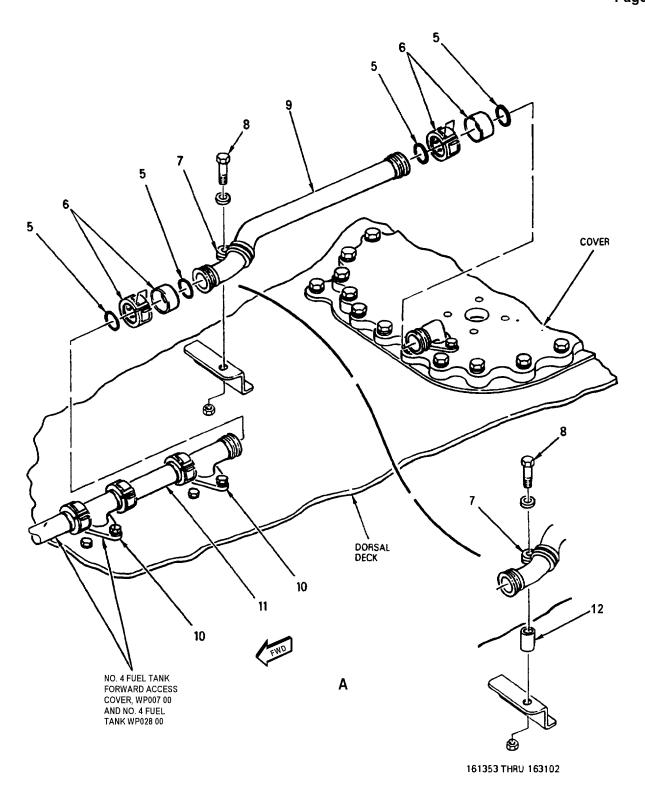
No. 4 Fuel Tank Aft Access Cover (Sheet 1)
